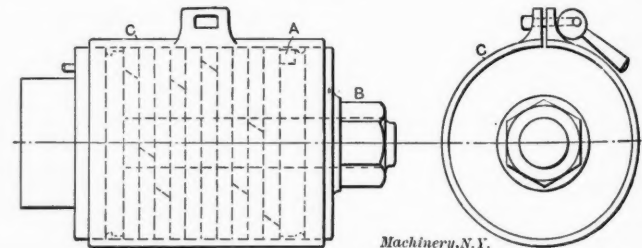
Fixture for Holding the Rings while finishing the Outside.
